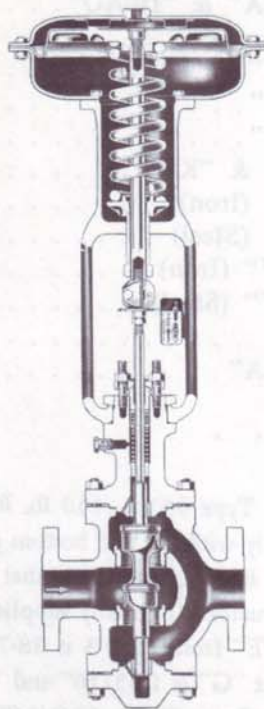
Type 657-A control valve with double port, top, and bottom guided V-pup valve plug.
